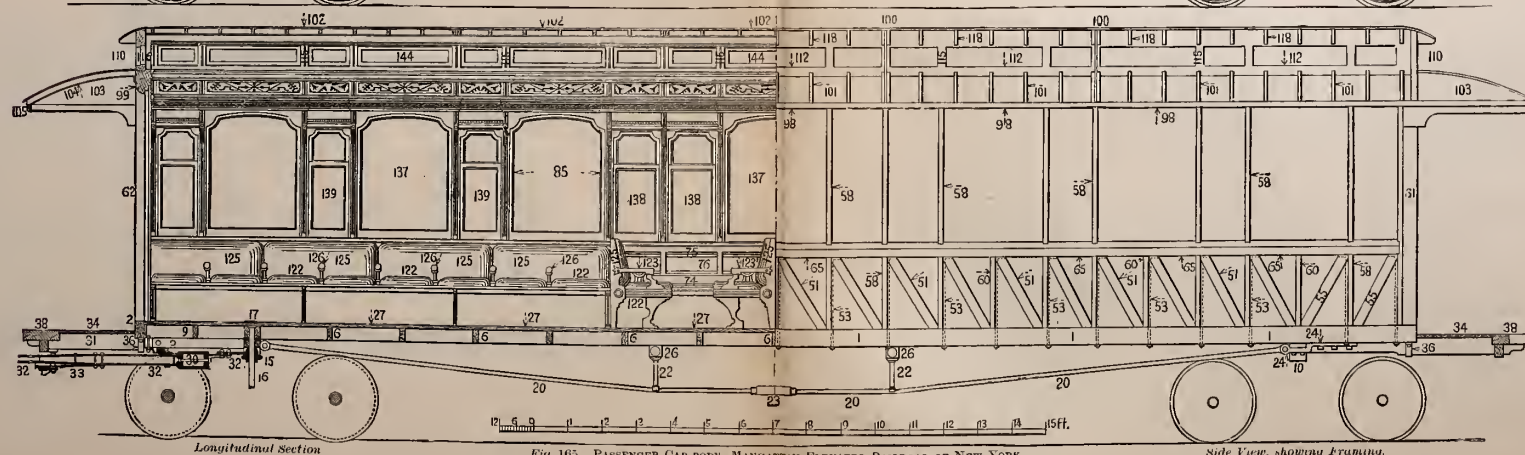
PASSENGER CAR-BODY, MANHATTAN ELEVATED RAILROAD OF NEW YORK.
